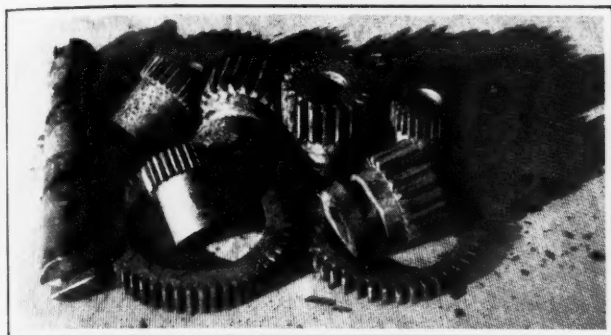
A Collection of Gears and Machine Parts after Heat-treatment, Showing Scale and Dirt; These Parts are Ready for the Cleaning Bath
